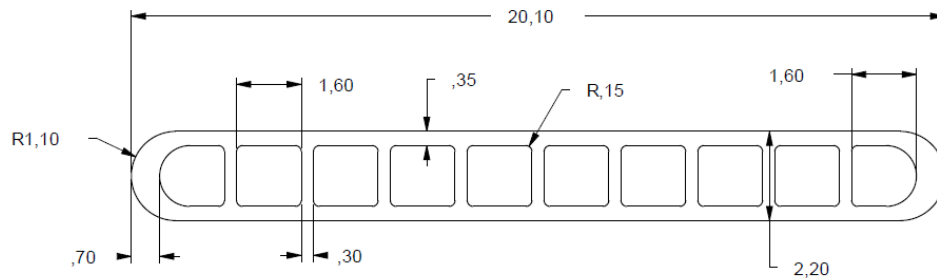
Drawing of the extruded MPE tubes in this work (dimensions in mm).
